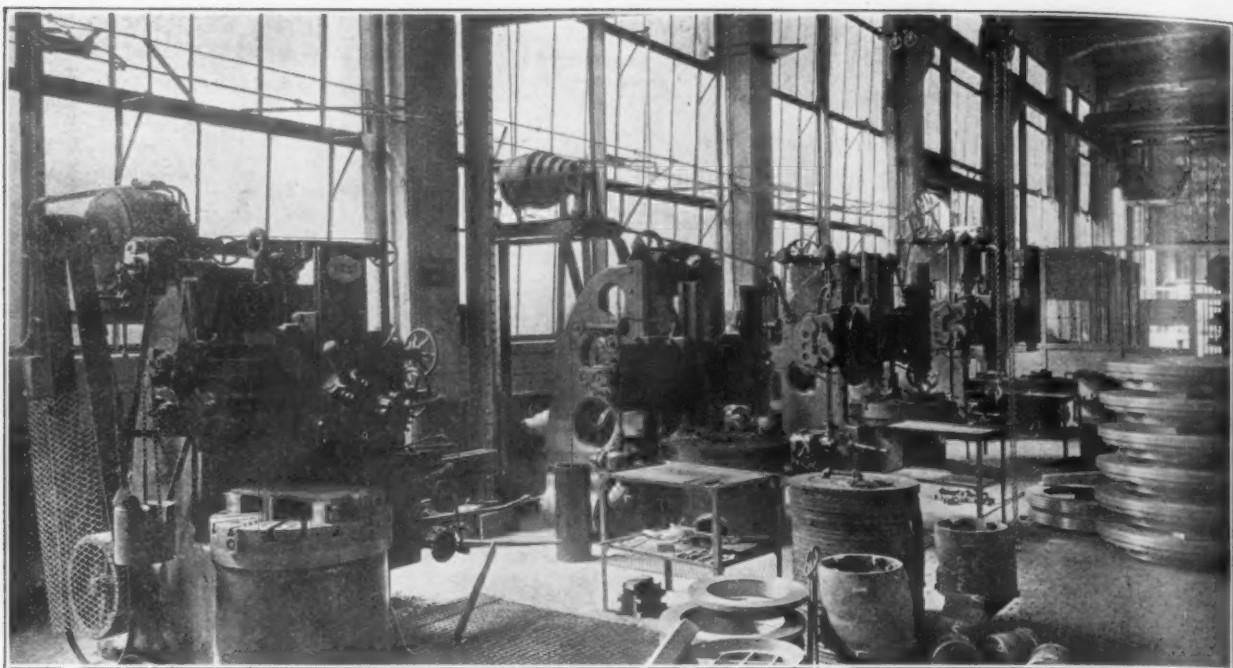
The Boring Mill Department. Note the mounting of the readily removable jib cranes
